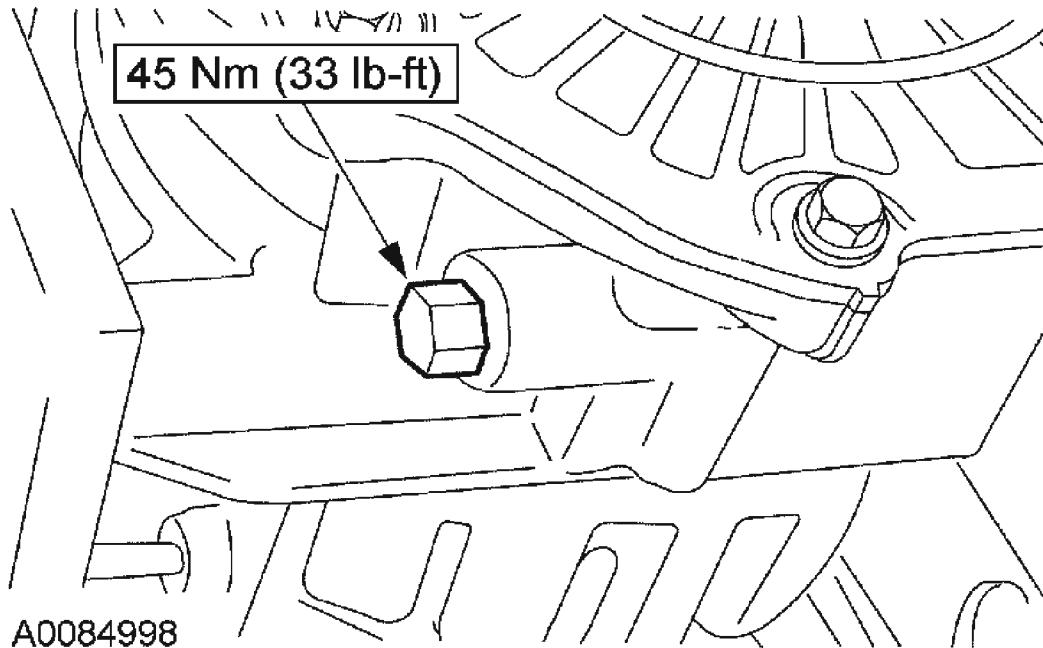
Installing Intermediate/Overdrive Band Anchor Bolt
